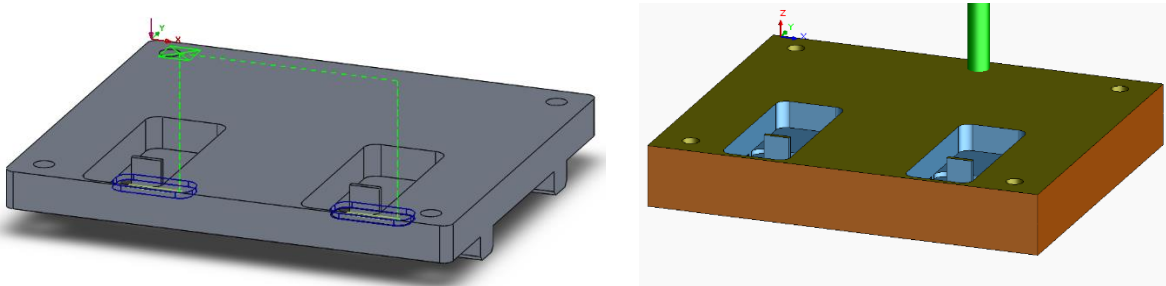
Machining bottom slots for clips (a) Tool path (b) Machined result
